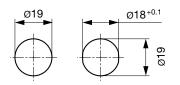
Pins Drawing 2: Pins with Soldering Aid Drawing 3: Clip for Pins
